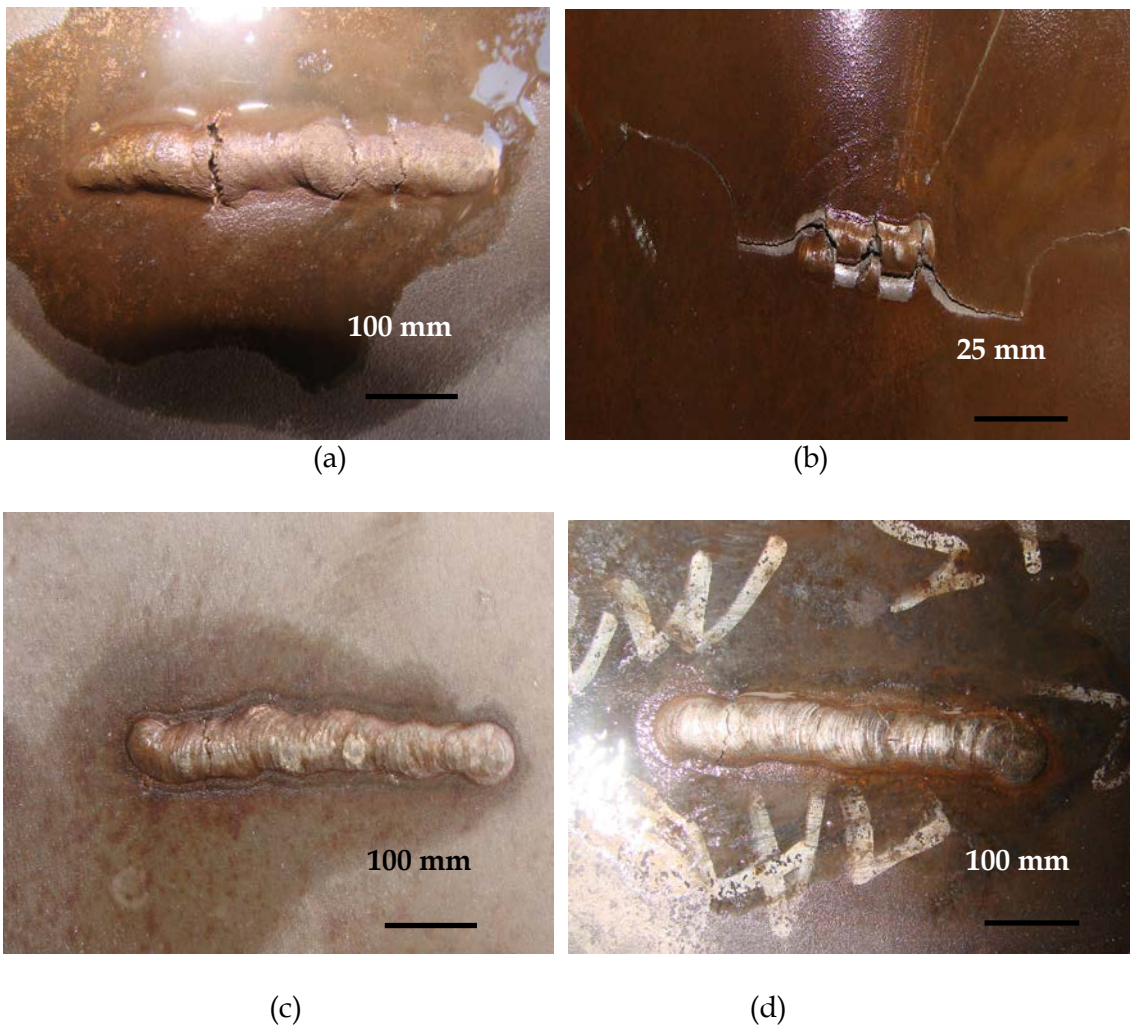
Surface appearance of the four plates (a) steel B, (b) steel H, (c) steel A and (d) steel M, after the 6th blast, clearly showing the brittle weld bead and any cracking that had occurred.
